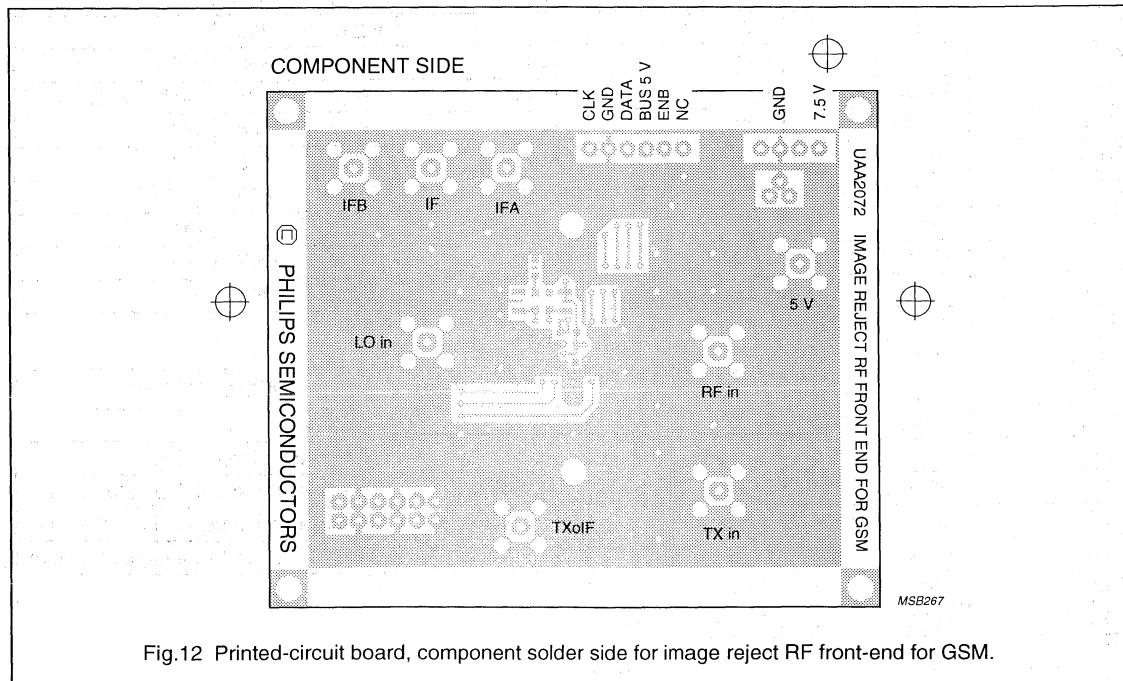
Printed-circuit board, component solder side for image reject RF front-end for GSM.
